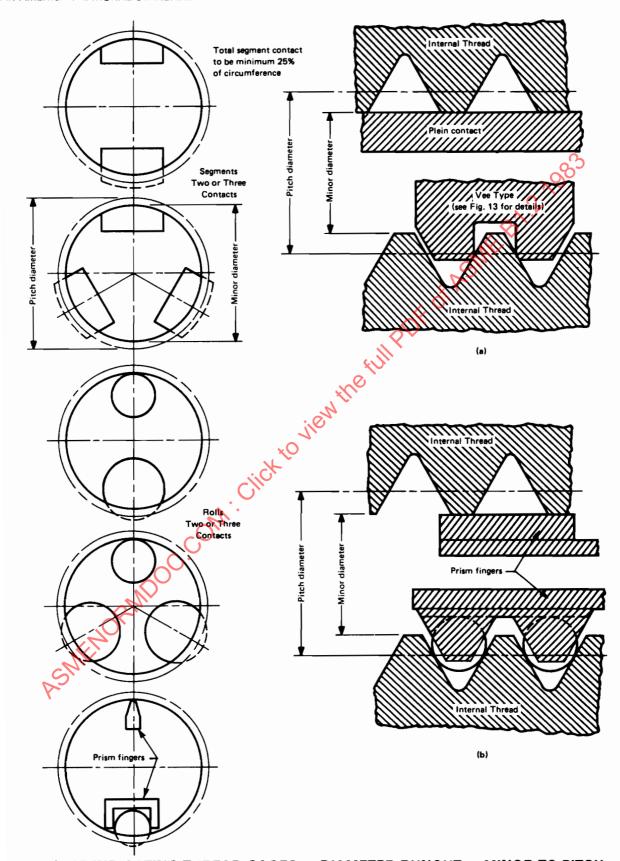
INDICATING THREAD GAGES — DIAMETER RUNOUT — MINOR TO PITCH
